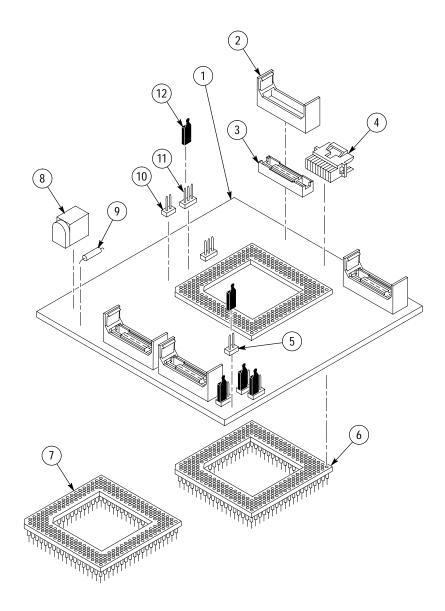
TMS 109A Socket 7 probe adapter exploded view
